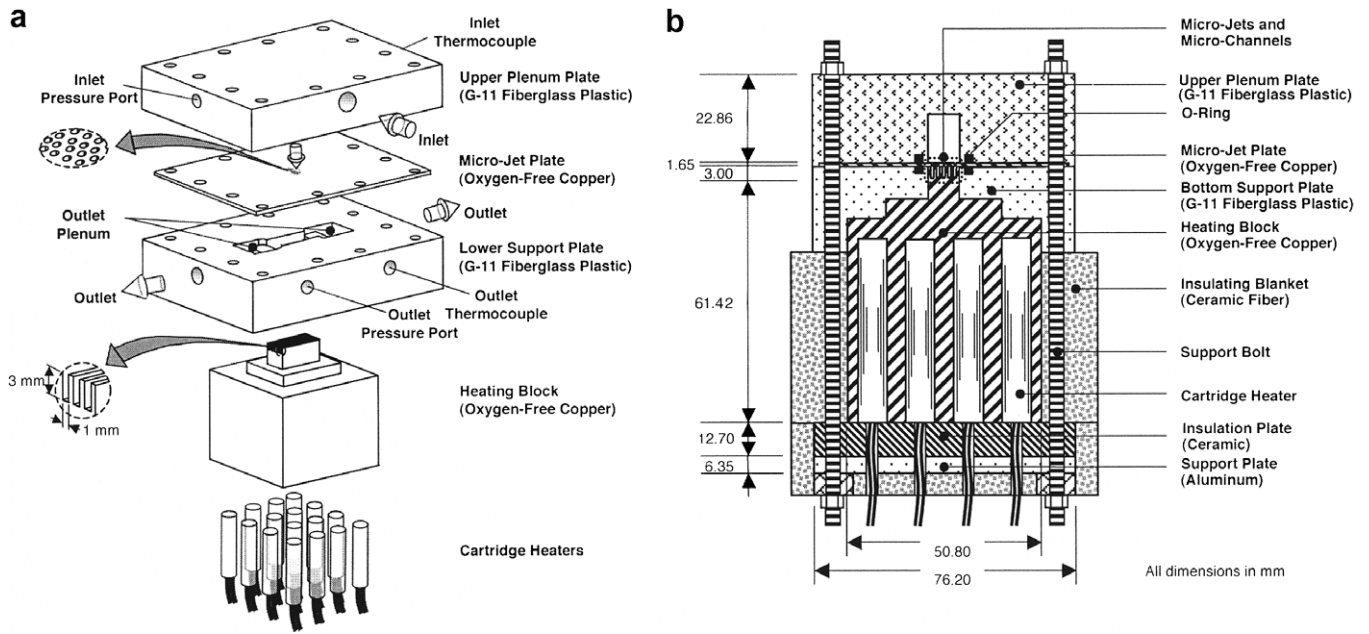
(a) Test module construction. (b) Cross-section of module assembly.
